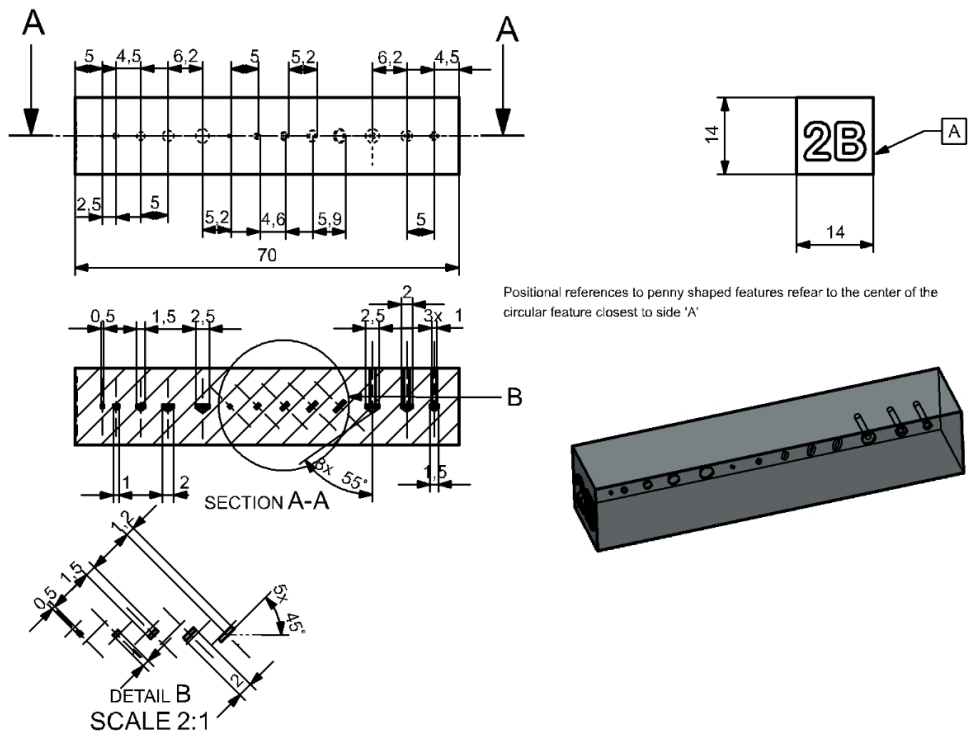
CAD drawing of IN 939 block 2B showing side printed holes with diameters Penny defects with roof angle of 35°.
